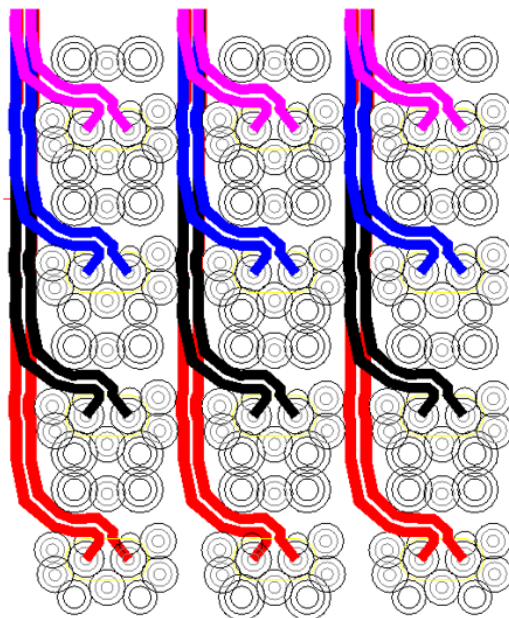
Paladin HD Footprint Breakout Coupling Anti-pad
